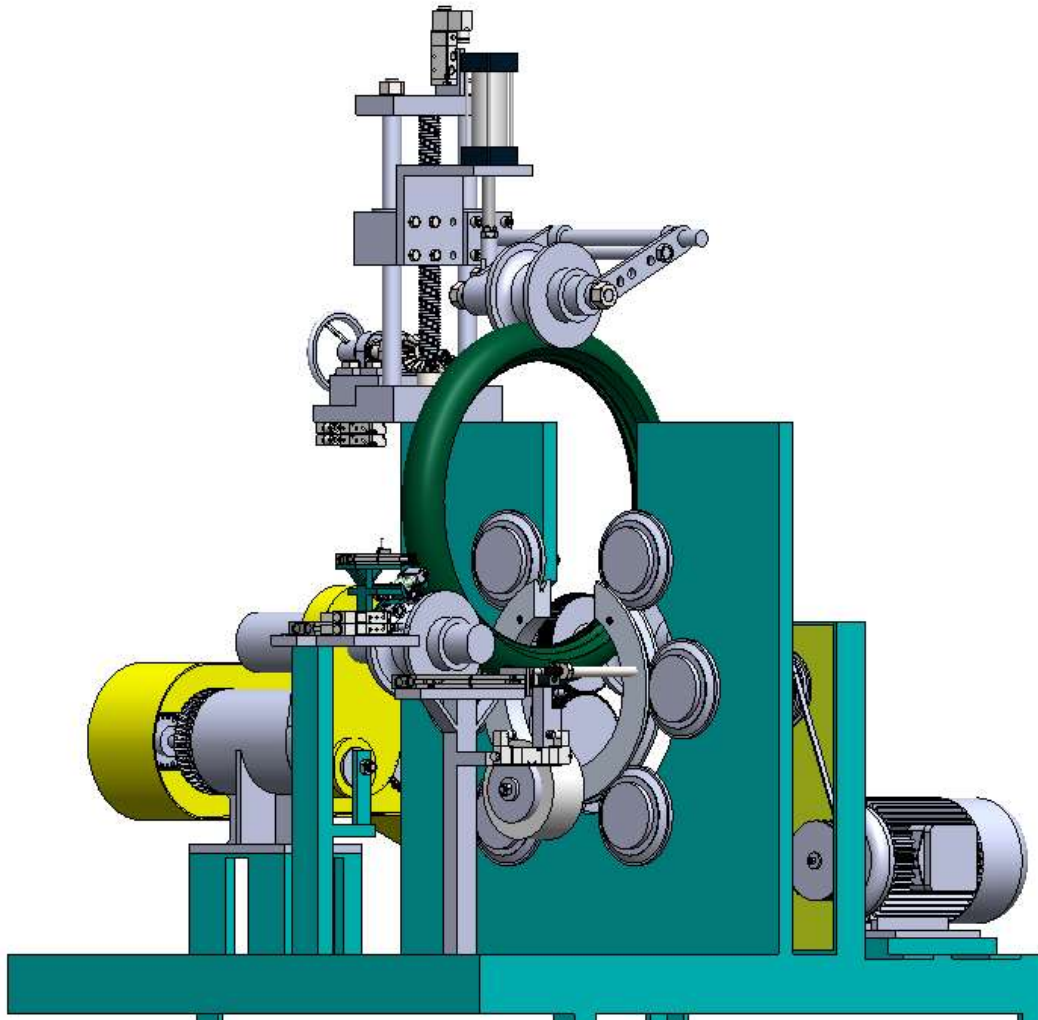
Tire pressing mechanism in SolidWorks before improvement
